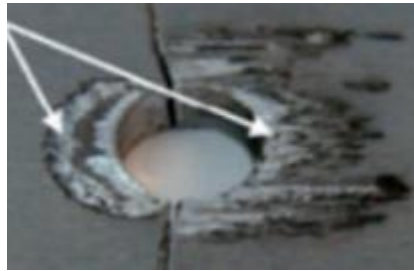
Visible inspection fretting deterioration of bolt holes
